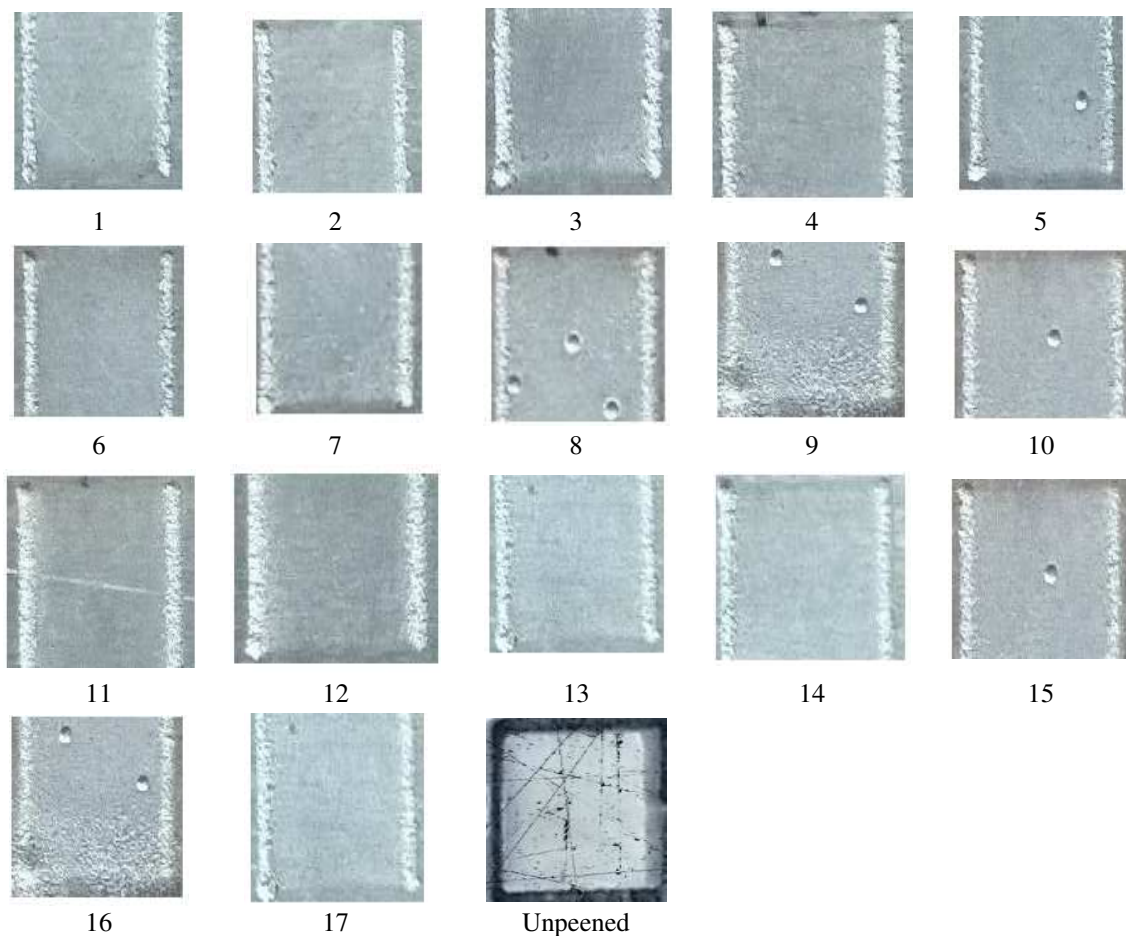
(a): Peened Workpiece - Aluminium 6063 Alloy.
